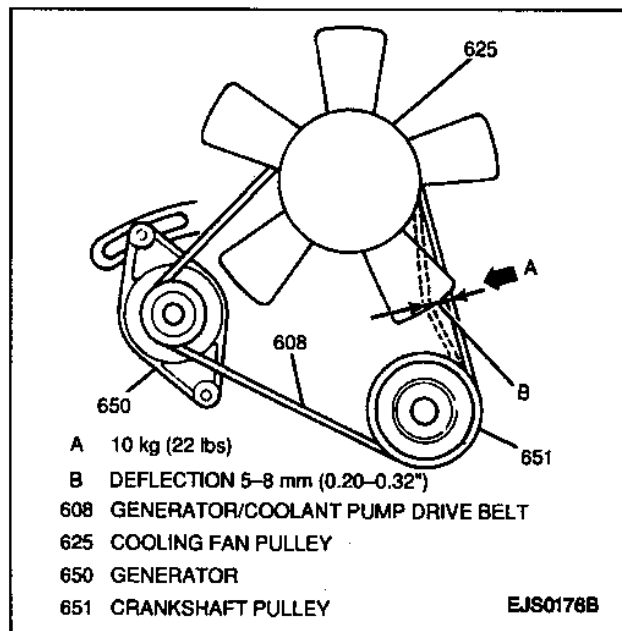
Generator/Coolant Pump Drive Belt Adjustment
